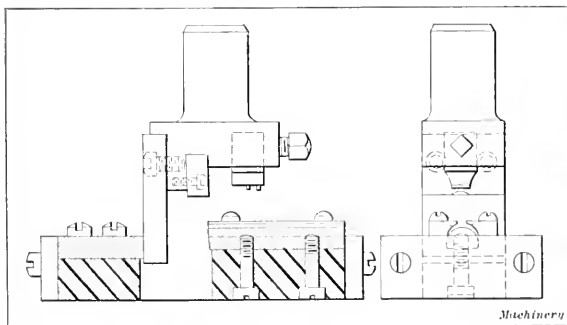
Shear, Punch and Die used for cutting off and forming the New Blades
